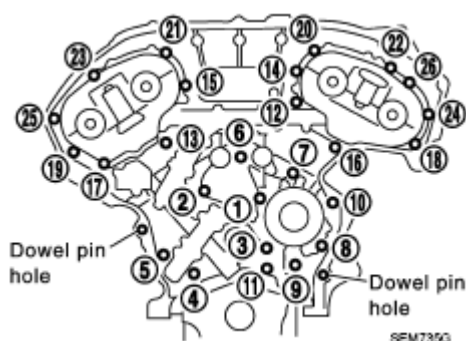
Identifying Rear Timing Chain Case Bolts Loosening Sequence
